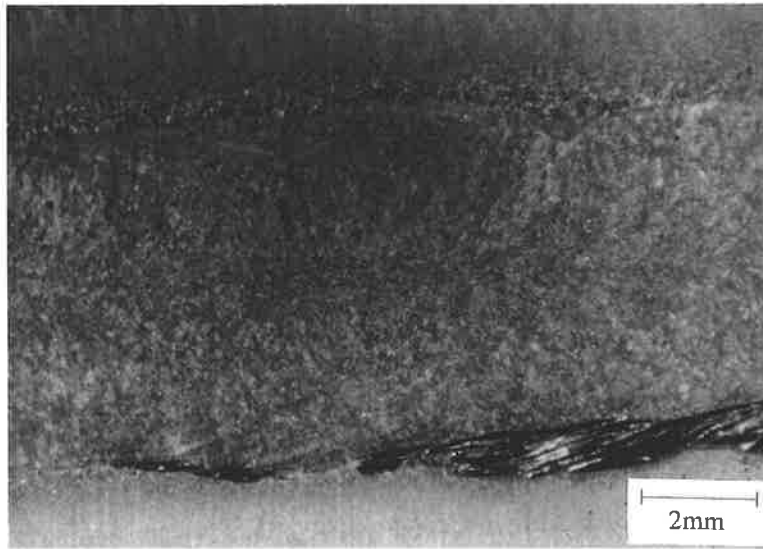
Longitudinal horizontal section of a weld made at 300mm/min and 163A (heat input equal to 0.70kJ/mm). In this weld the total number of hollow bead is 1 and the total length is 1mm.
